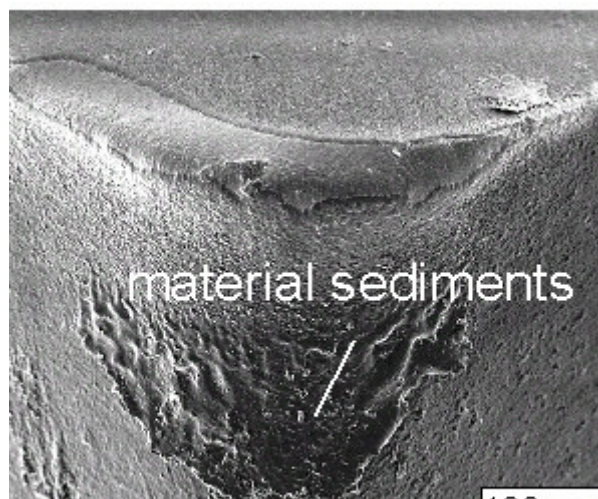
Material sediments at the flank after the machining of GFRP- EPR 8
